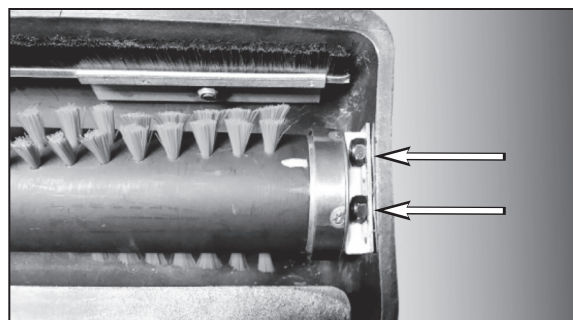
Pull out old brush roll from the sweeper. This will release the tension from the belt.
